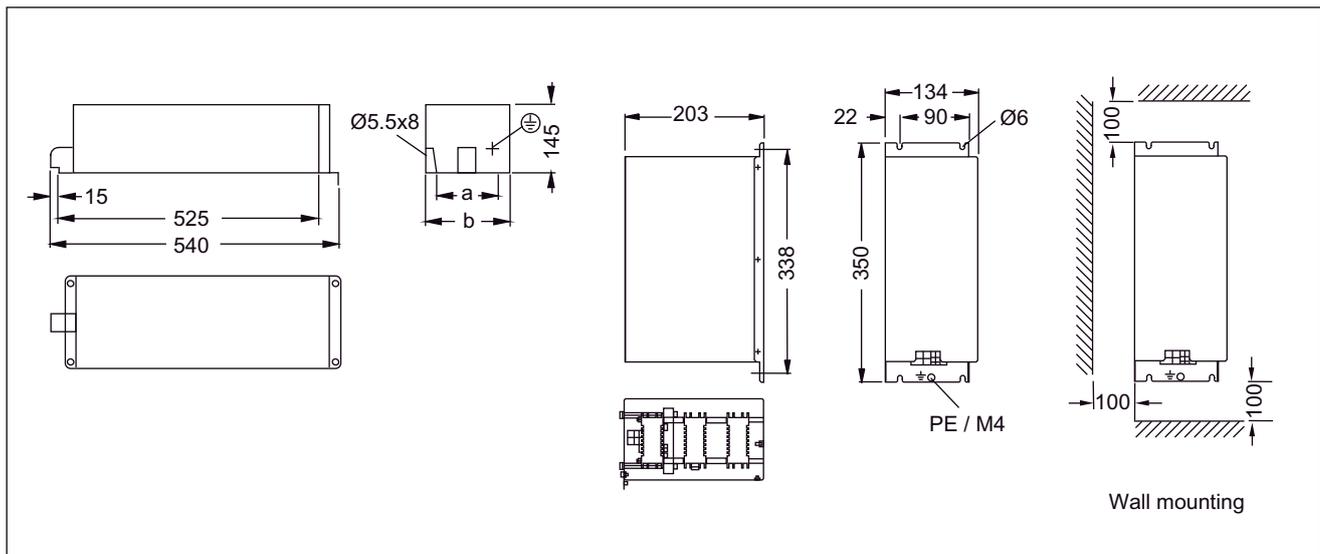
Dimension drawing: Braking resistor 7.5 kW and 15 kW
